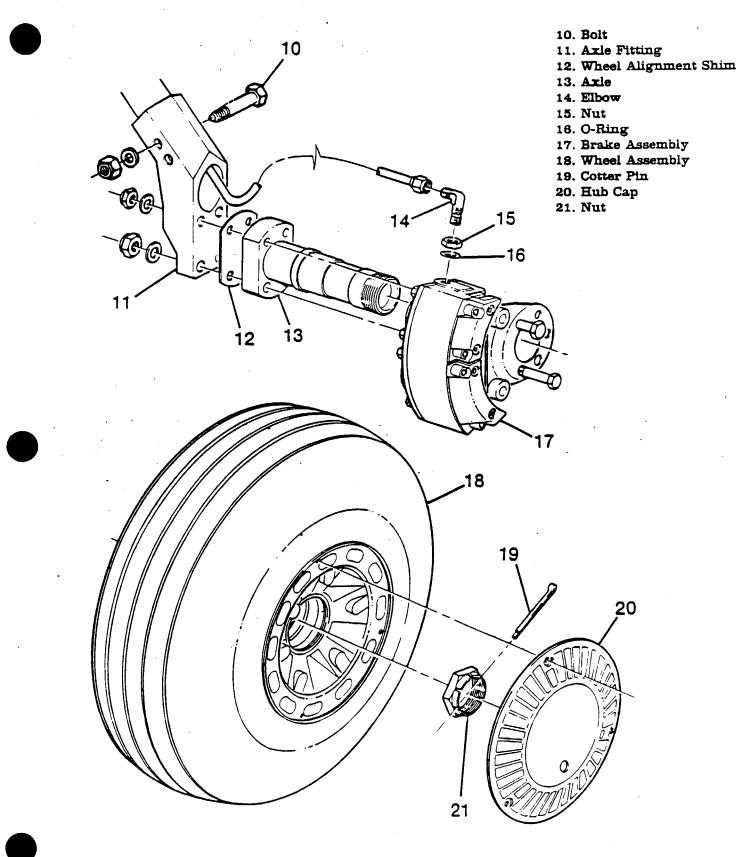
Main Landing Gear (Sheet 2 of 2)
